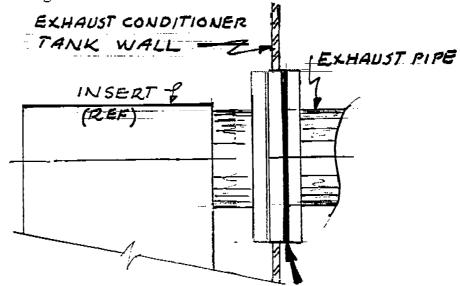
Gasket Between Exhaust Pipe and the Flange of the Exhaust Conditioner
